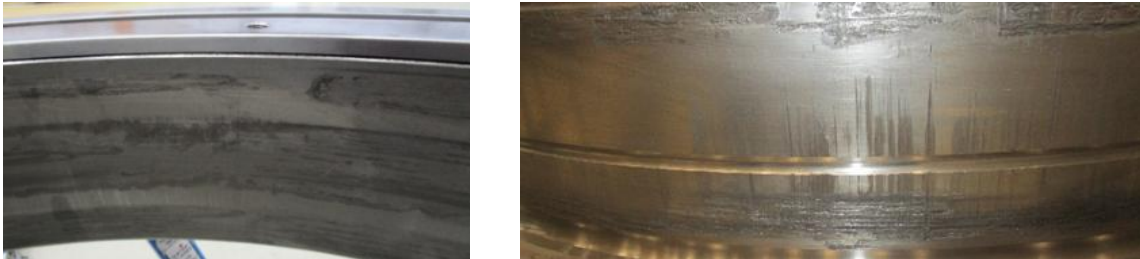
Exemplary impact of creeping on the bearing seat of a large-sized diameter bearing (left: inner ring; right: shaft) [LIE22]
